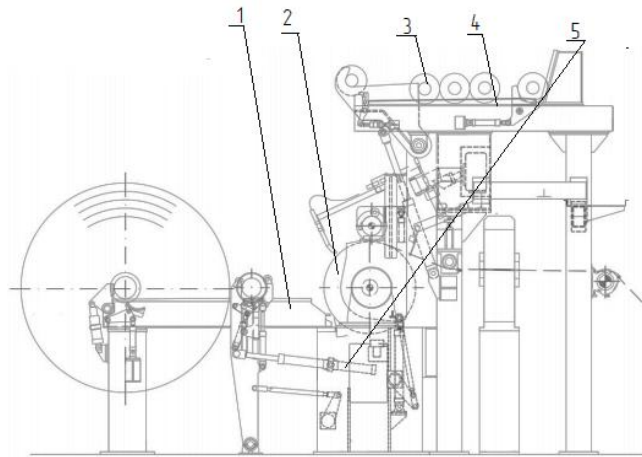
shows the design of the peripheral reel [2], consisting of a frame, a tambour shaft, a drum and a mechanism for pressing the roll to the drum. The mechanism for pressing the roll is mounted on a movable carriage that is moved by a drive on the frame guides. Such upgrade allows to increase the adjustable diameter of the wound-up roll by moving the carriage.
